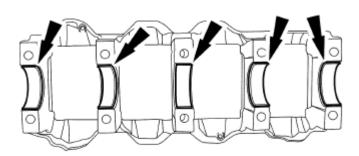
Locating Crankshaft Courtesy of FORD MOTOR CO.
